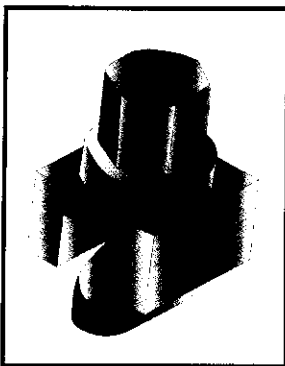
Tool Especially Designed to Help Remove Cam Bolt Plugs
